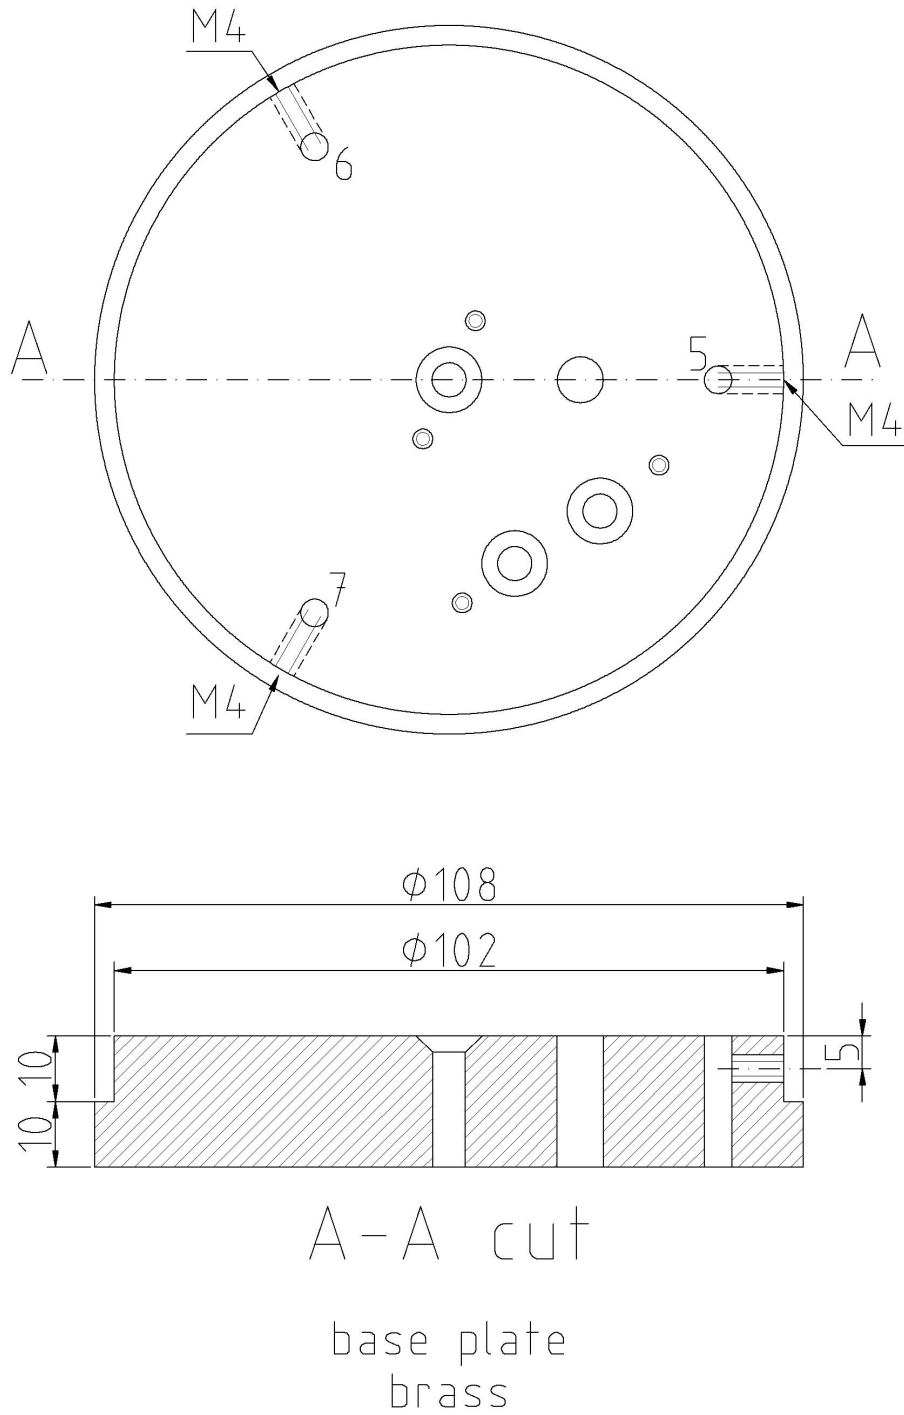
Dimensions of the base plate, [CD:\Drawings\Prototype\base\_plate\_dimension.dxf]
